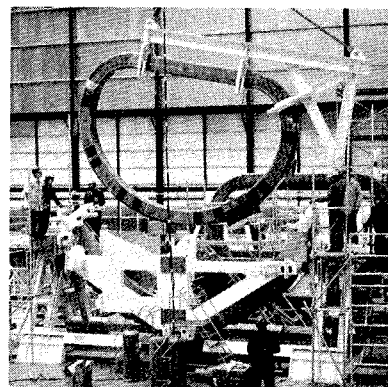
Assembly of a toroidal field coil in the mechanical structure
